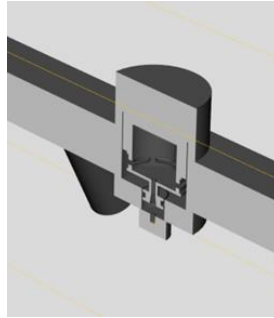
15 In Z-Z plane Internal geometry with injector assembly with lids
